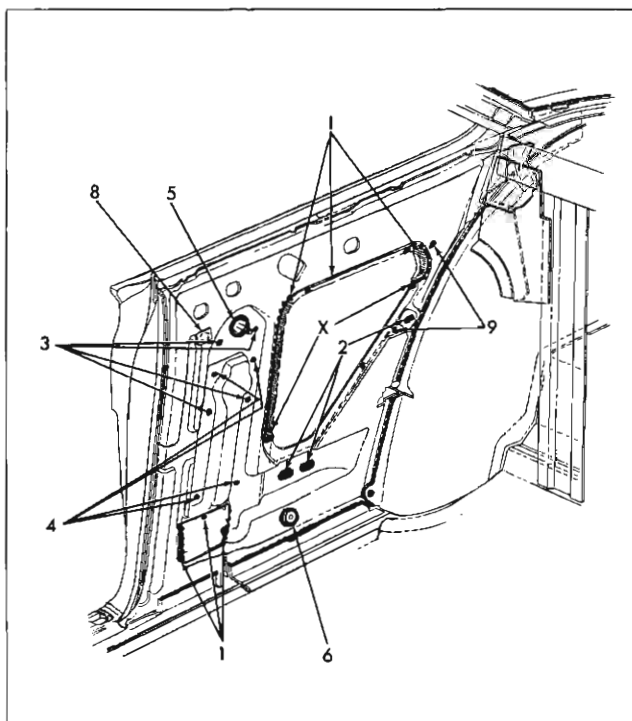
Inner Panel Sealing - 47 and 57 Styles
